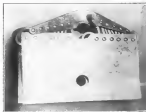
THE LANDING GEAR BRIDGE WITH TWELVE RUBBER STRIPS.
